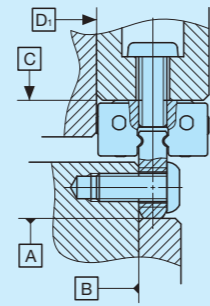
Reference mounting surface of LWL1...Y and typical mounting structure ②
